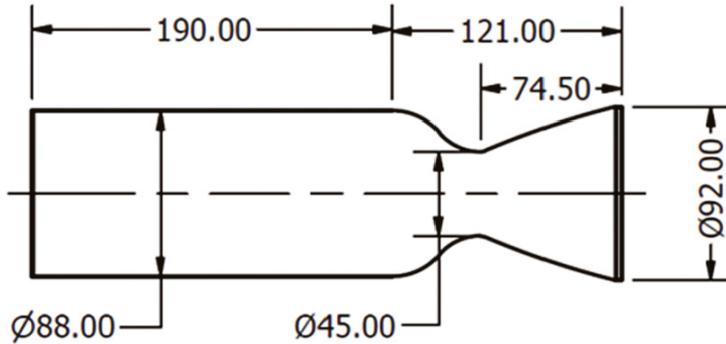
Geometry of the thrust chamber of Zawisza rocket engine
